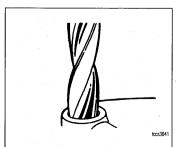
Drill out the damaged threads with the specified size bit. Be sure to drill completely through the hole or to the bottom of a blind hole
